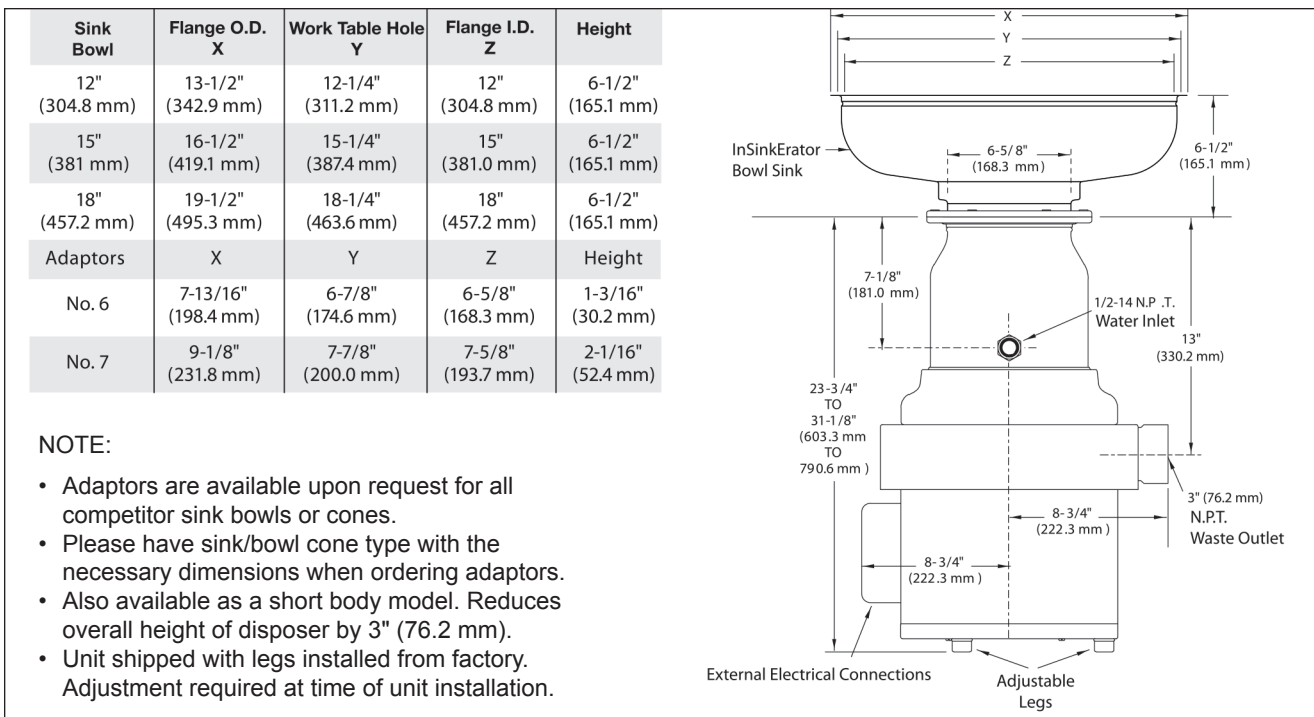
Dimensions - Models SS-300, SS-500 & SS1000
